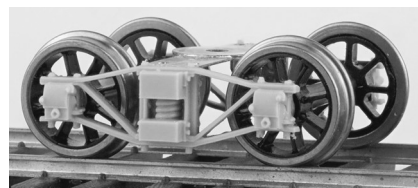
Flash has been trimmed from the sideframe casting and holes have been drilled to clear the waisted bearings that protrude from the bogie frame.
